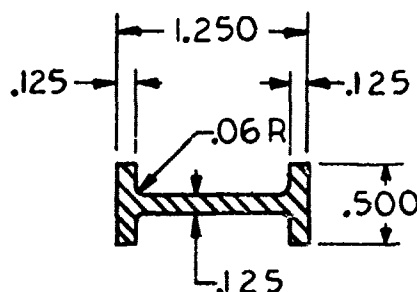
Cross section of legs and struts for A-1 and F-1 structural mock-up models.
